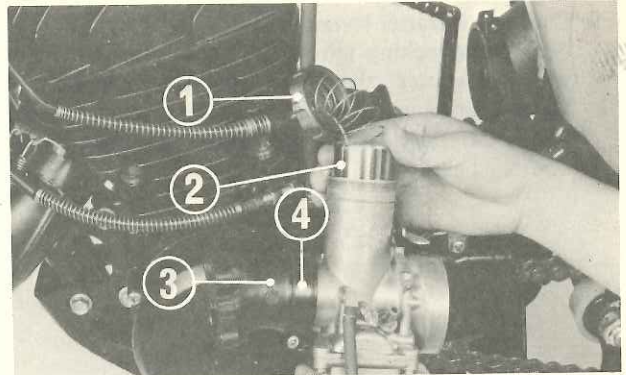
(1) Carburetor top (2) Throttle valve (3) Inlet pipe (4) Carburetor insulator band
